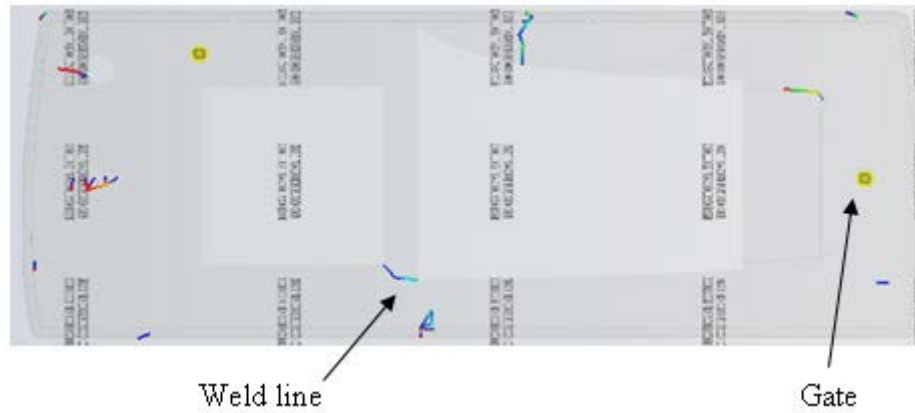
Weld lines produced by two injection gates at location B
